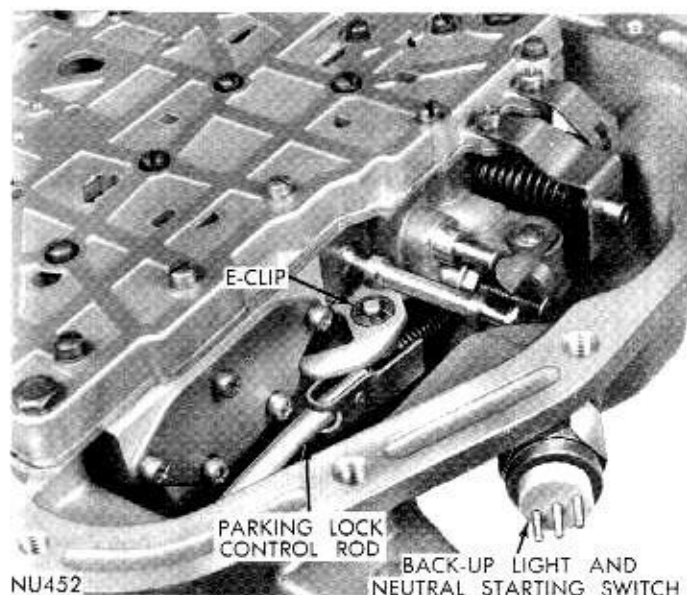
Parking Lock Control Rod Retaining E-Clip
